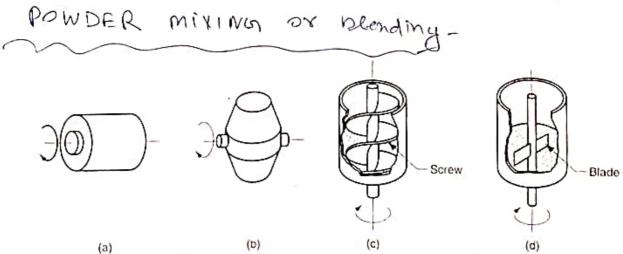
Several blending and mixing devices: (a) rotating drum, (b) rotating double cone, (c) screw mixer, and (d) blade mixer.
